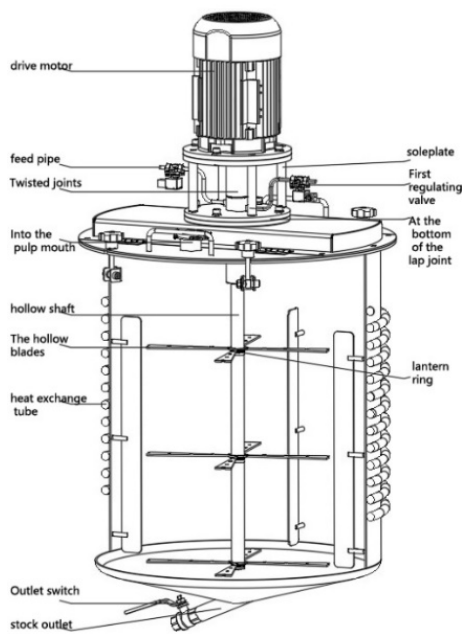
schematic diagram of the three-dimensional structure of the cooking slurry assembly
